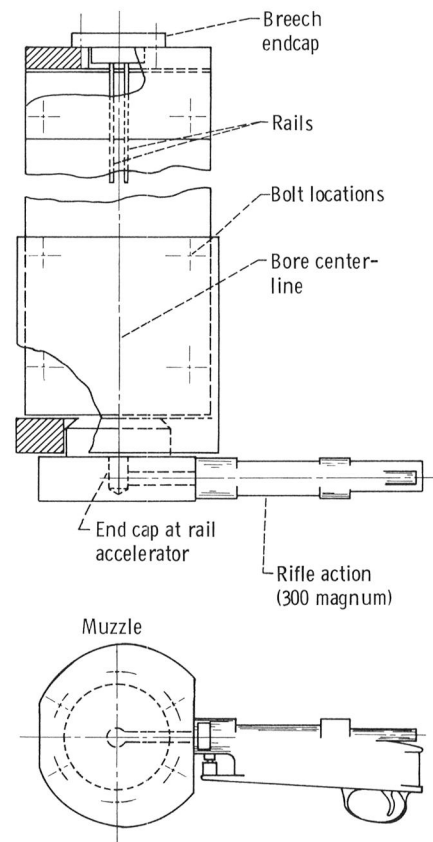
Top and end views of hardware for pyrotechnic (gun powder) calibration technique. End cap is threaded to accept rifle action at right angles to accelerator bore.
